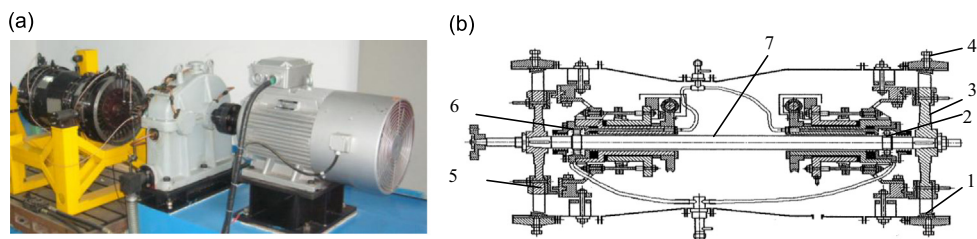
Aero-engine rotor tester: (a) aero-engine rotor tester and (b) section drawing of aero-engine rotor tester. 1 – rubbing ring, 2 – ball bearing, 3 – turbine disc, 4 – bolt for deforming rubbing ring, 5 – compressor disc, 6 – ball bearing, 7 – shaft.
